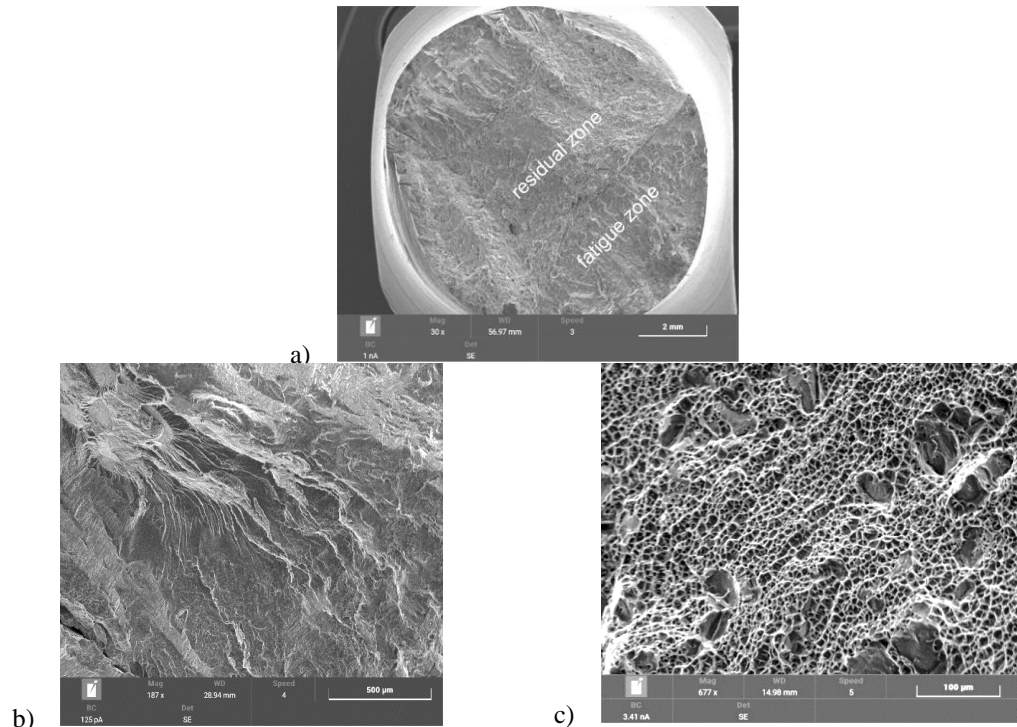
Fatigue fracture of the alloy after T6 treatment caused by combination of bending and twisting $\tau_a=0.5\sigma_a$, a) fracture morphology, b) surface in the area of the fatigue zone, c) surface in the area of the residual zone (specimen 38 – 14 504 cycles).
